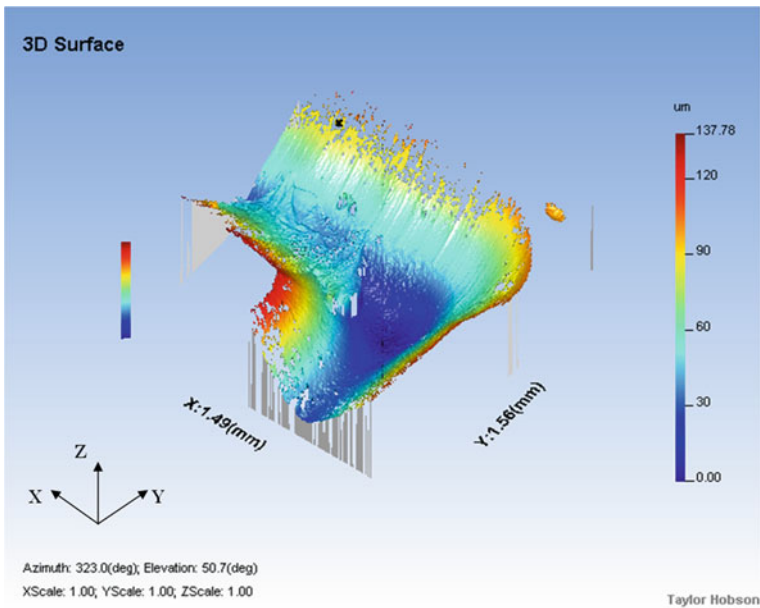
Crater wear region of a cutting tool insert (grooved)
